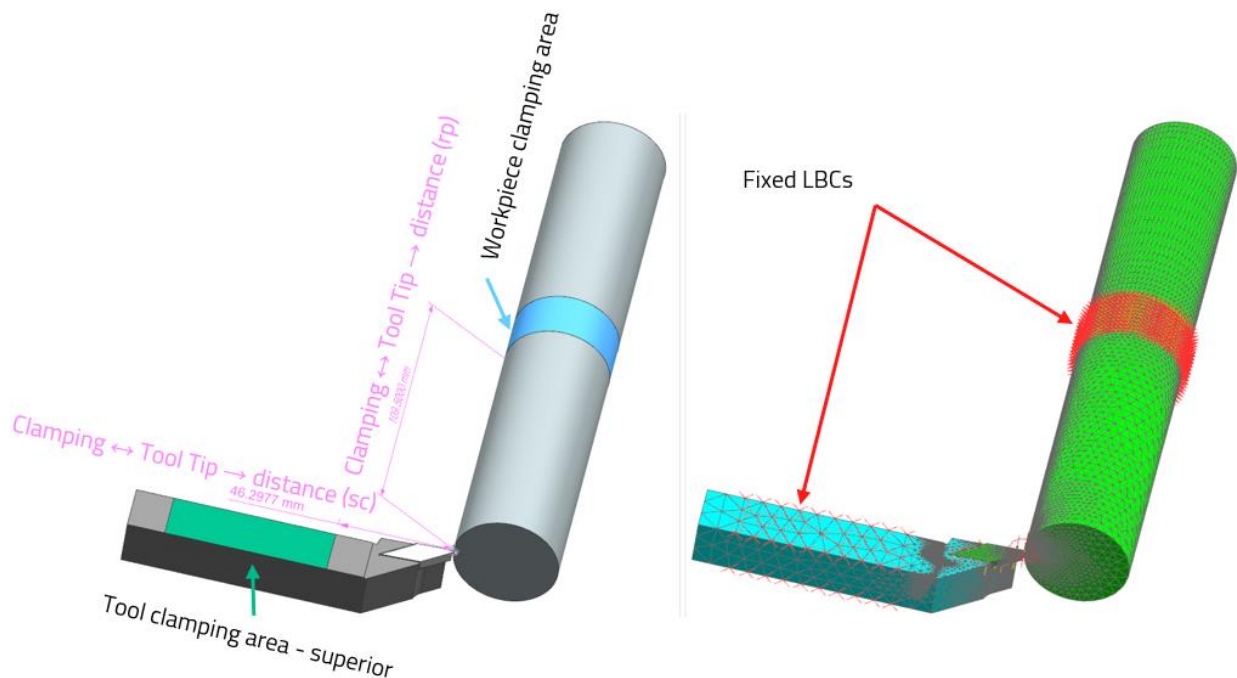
Cutting tool – workpiece assembly – CAD model (left) – FEM model (right)
